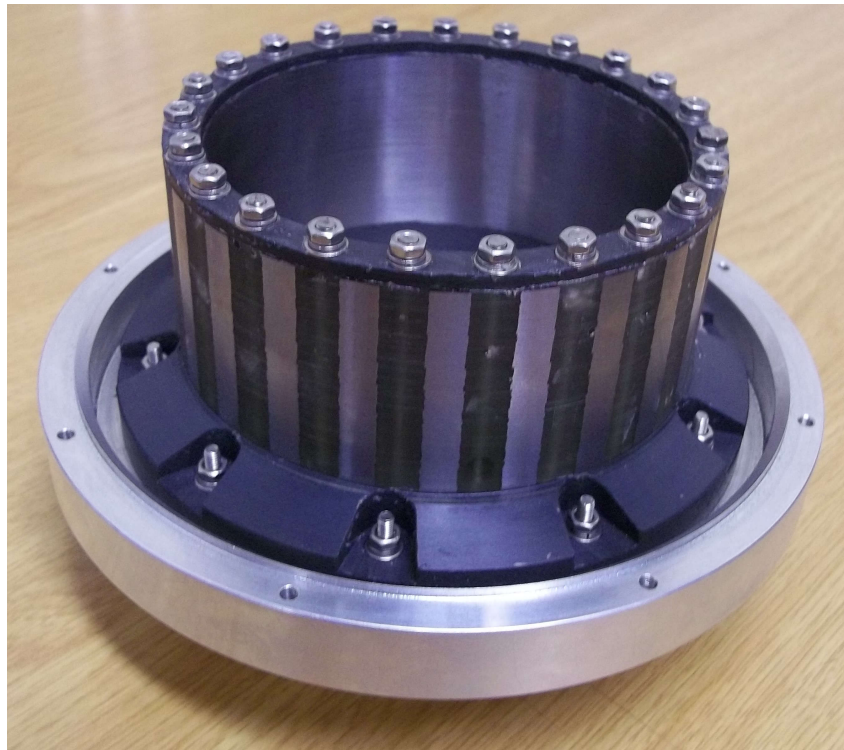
Improved modulator assembly with aluminium casing and vesconite support ring.
